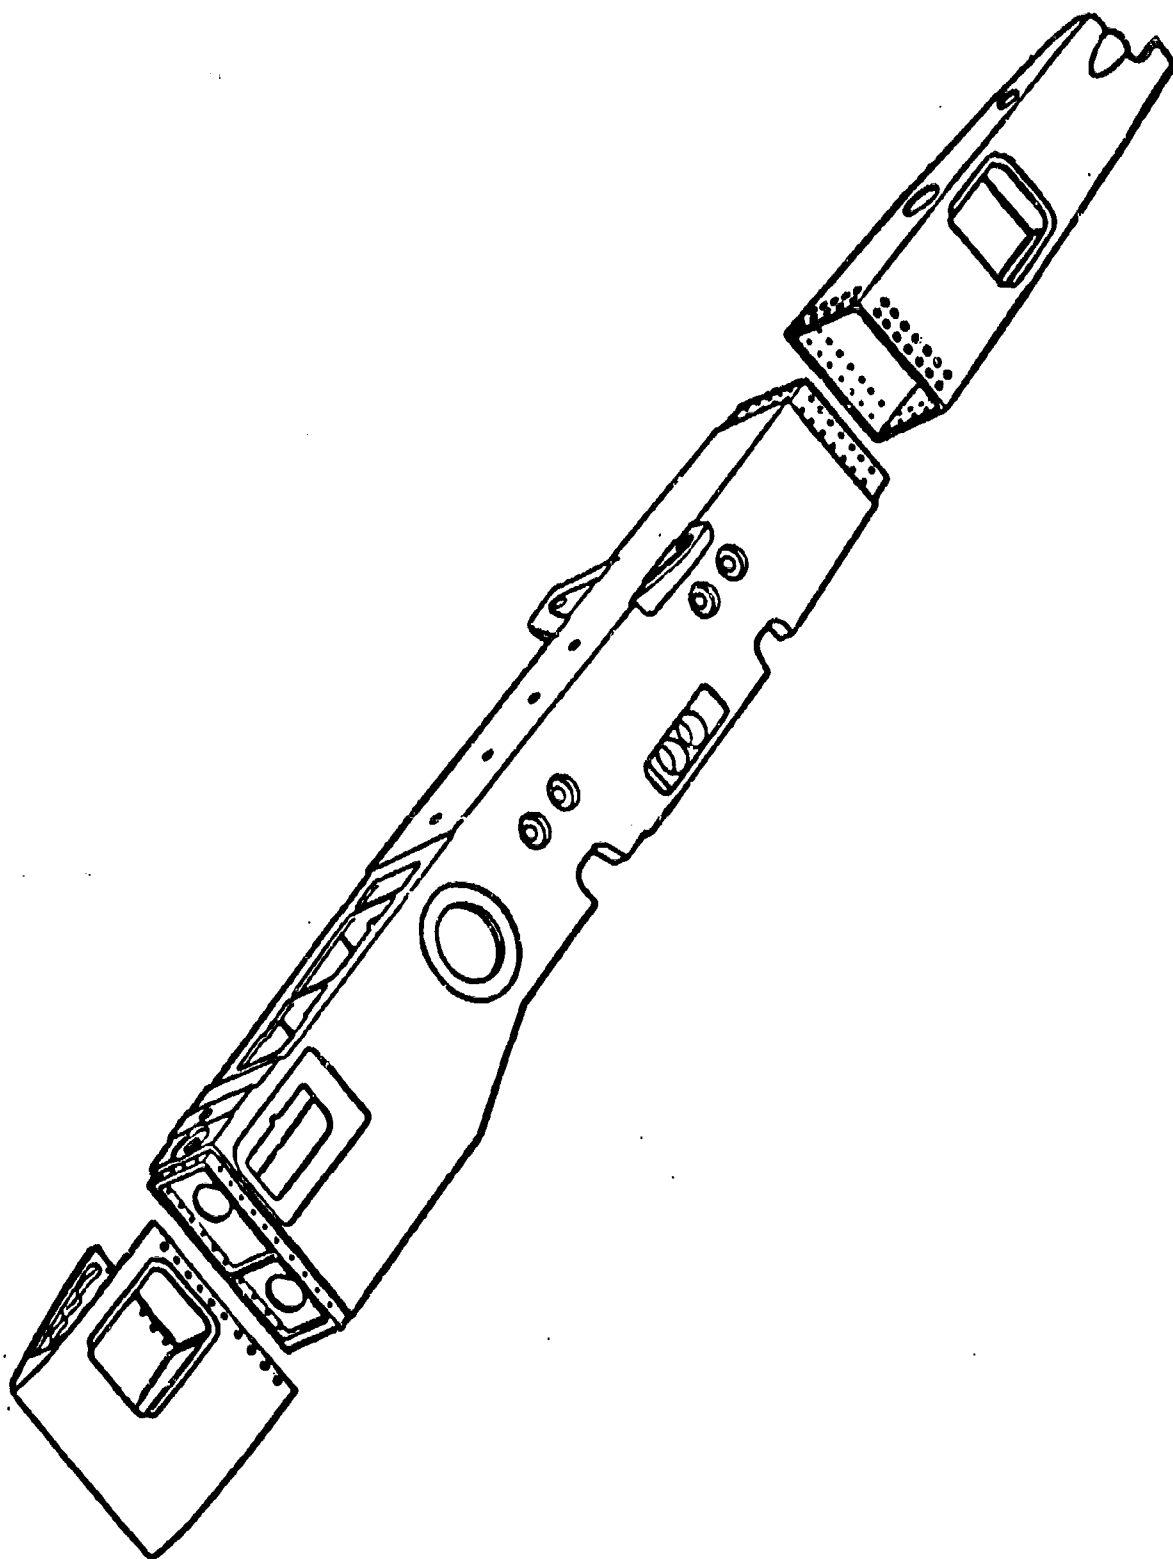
PYLON ASSEMBLY, CASTING DESIGN, THREE SECTIONS:
